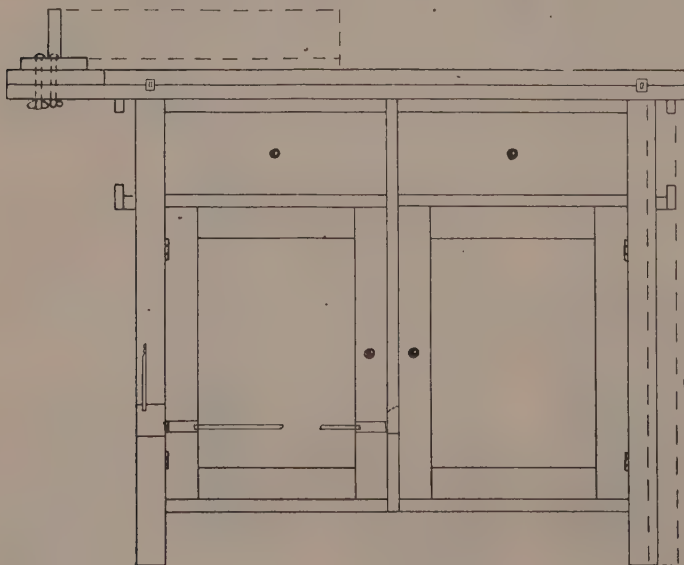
FRONT ELEVATION, WITH SCALE.
